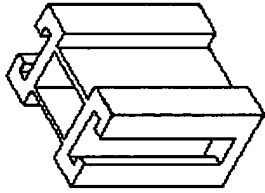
C: Two connectors used to connect two floor frame panels as well as two ceiling frame panels (20 foot collapsible cargo container).
